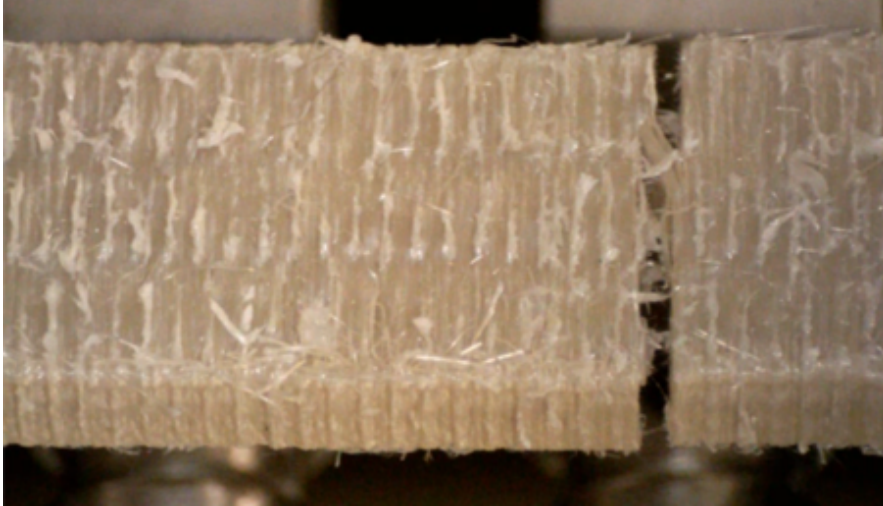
Example of fracture in a D1 specimen (short ABC) tested with the Zwick setup.
